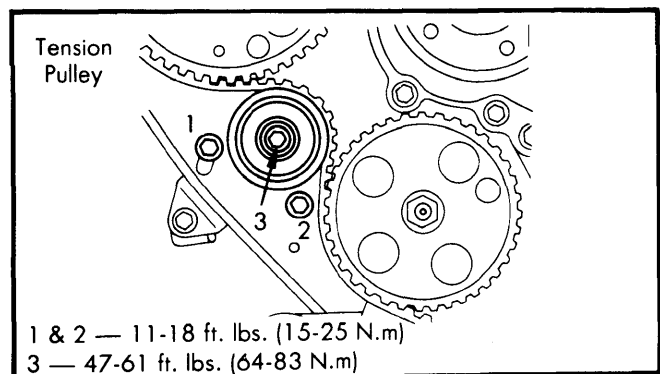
I-Mark Tension Pulley Bolt Tightening Sequence
